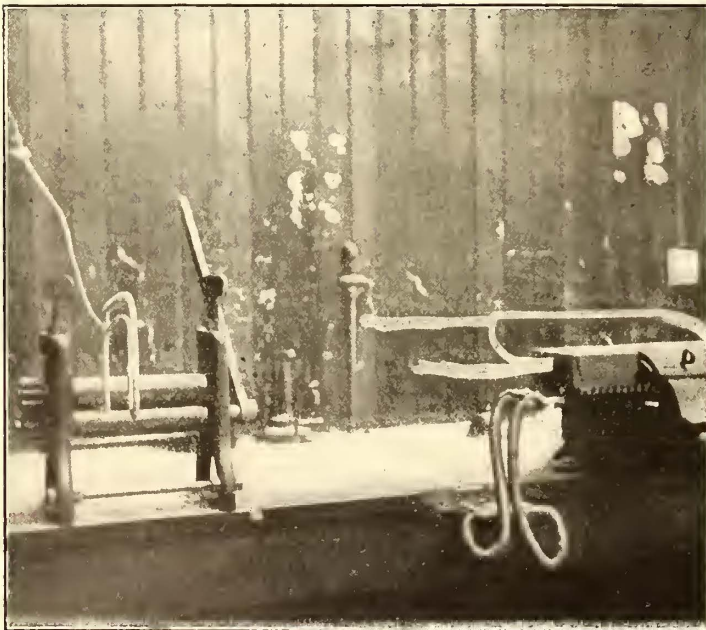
DEVICES USED IN THE MAKING OF ARMATURE COILS
